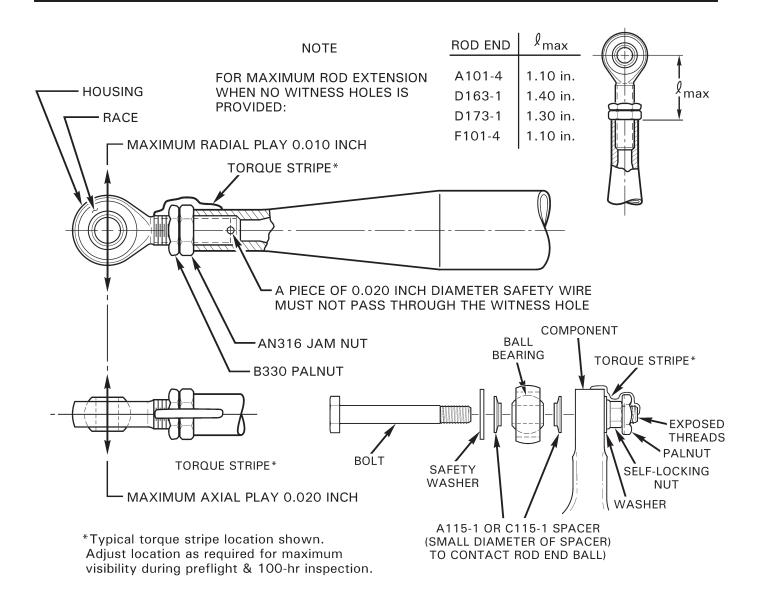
ROD END AND SPHERICAL BEARING PLAY LIMITS AND TORQUE STRIPE APPLICATION
